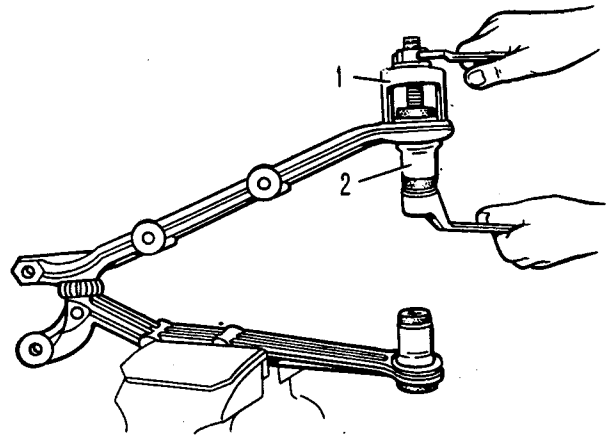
Pressing Out Lower Wishbone Silent Blocks:
